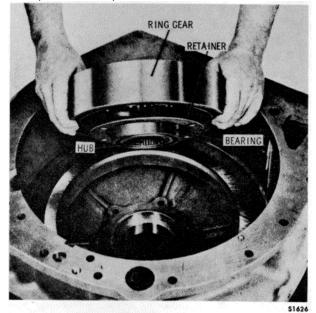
Removing Splitter Ring Gear and Attached Parts
